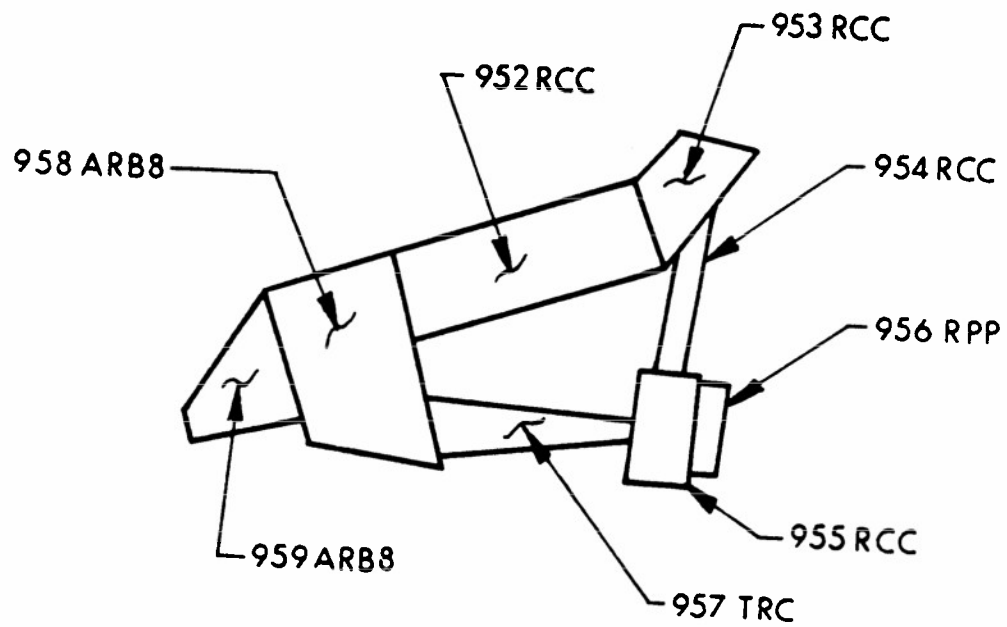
Solids Used to Describe the Heater of the Black Hawk.
